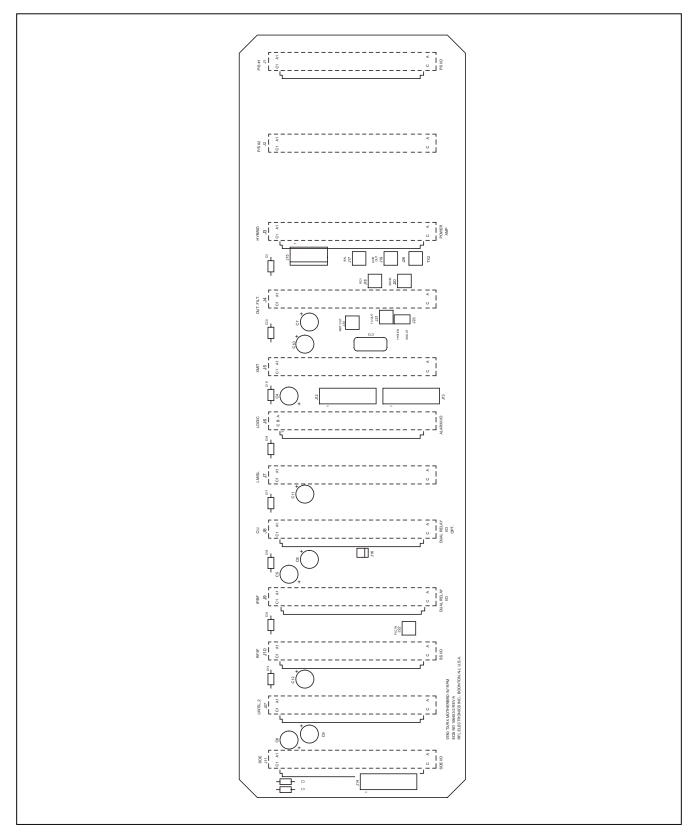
Component locator drawing, RFL 9780 Tx/Rx Motherboard (Assembly No. 106450-2)
